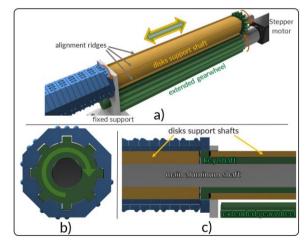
Octagonal disk rotating mechanism: a) Top view; b) Front view; c) Cross section.
